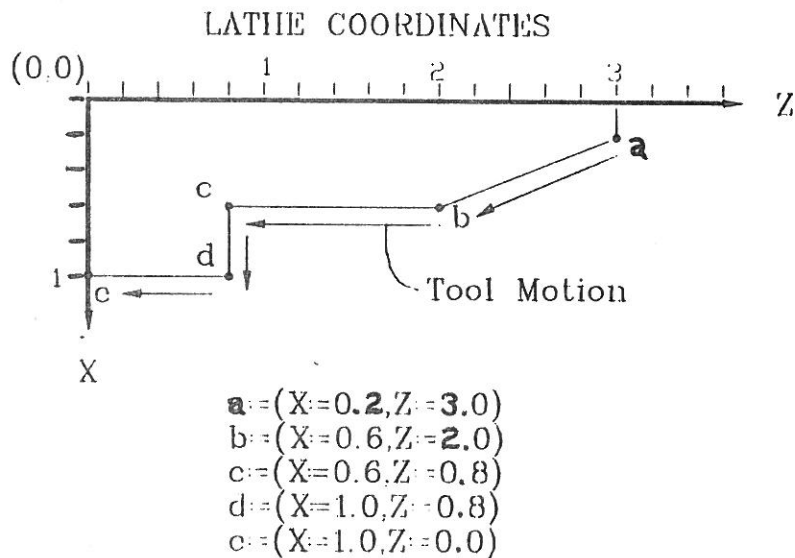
Two-Dimensional View Of Absolute Dimensioning Of Coordinate Points On A Workpiece
